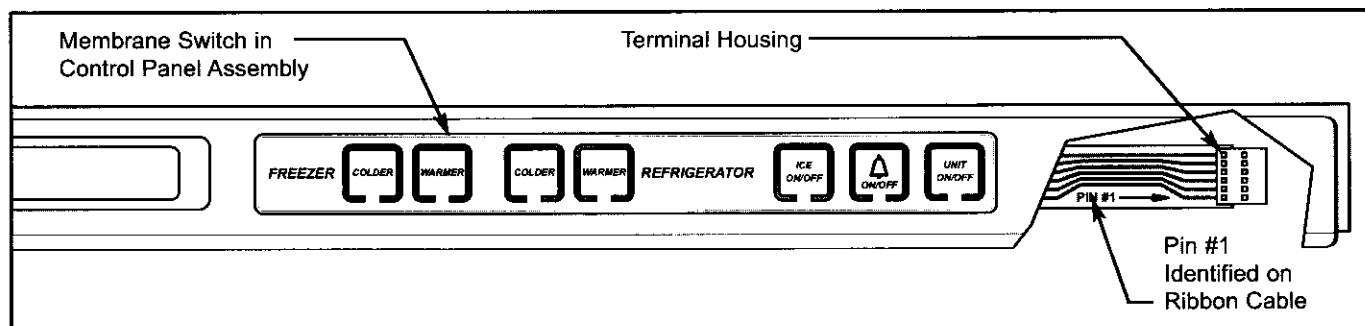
700BCI-3 Control Panel Assembly with Cut-Away View to Show Ribbon Cable
